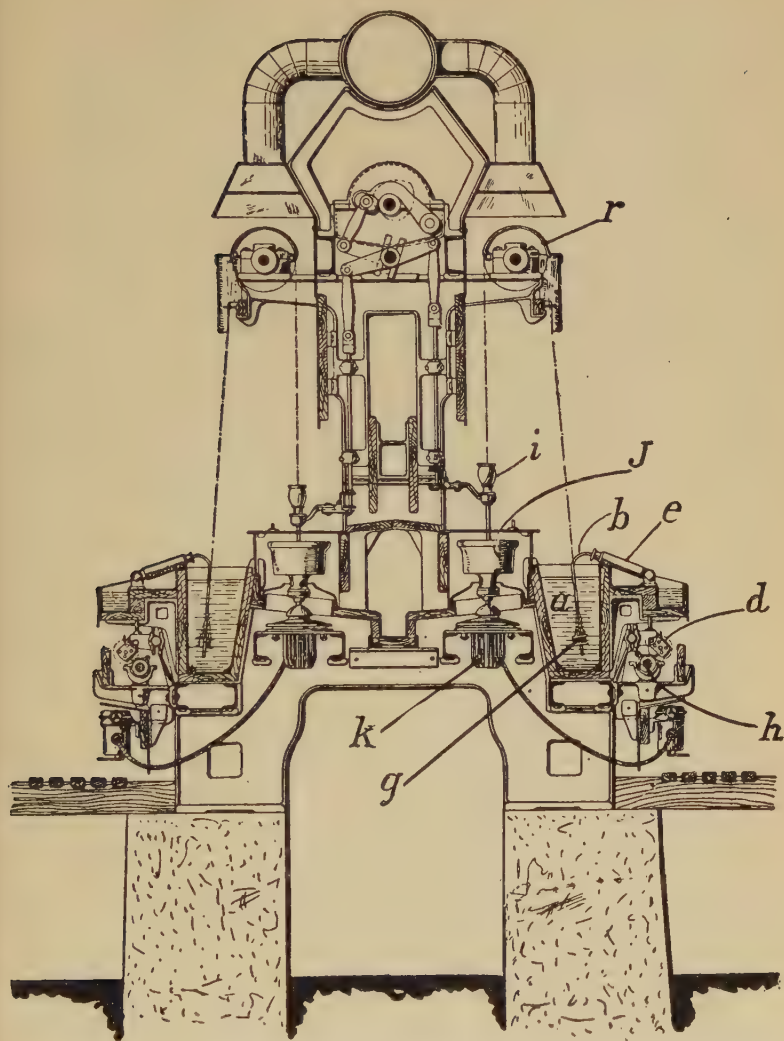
Cross Section of Haubold Centrifugal Pot Spinning Machine,
